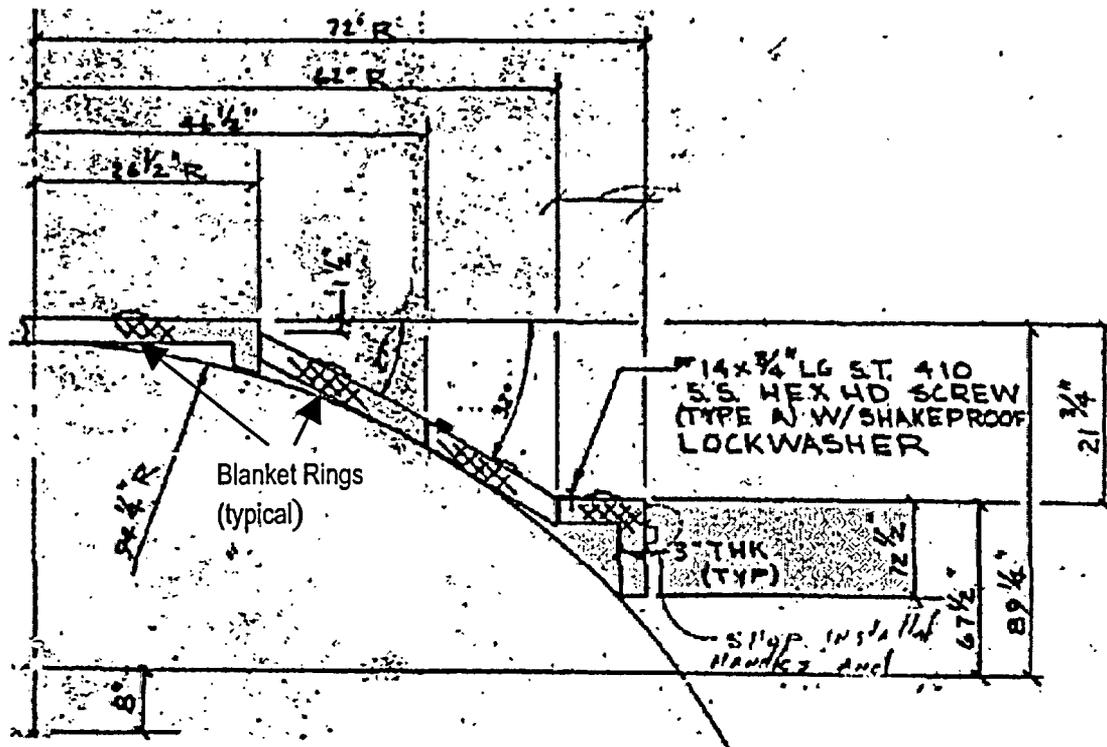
RPV Head Side View showing close conforming Insulation Panel Layout
